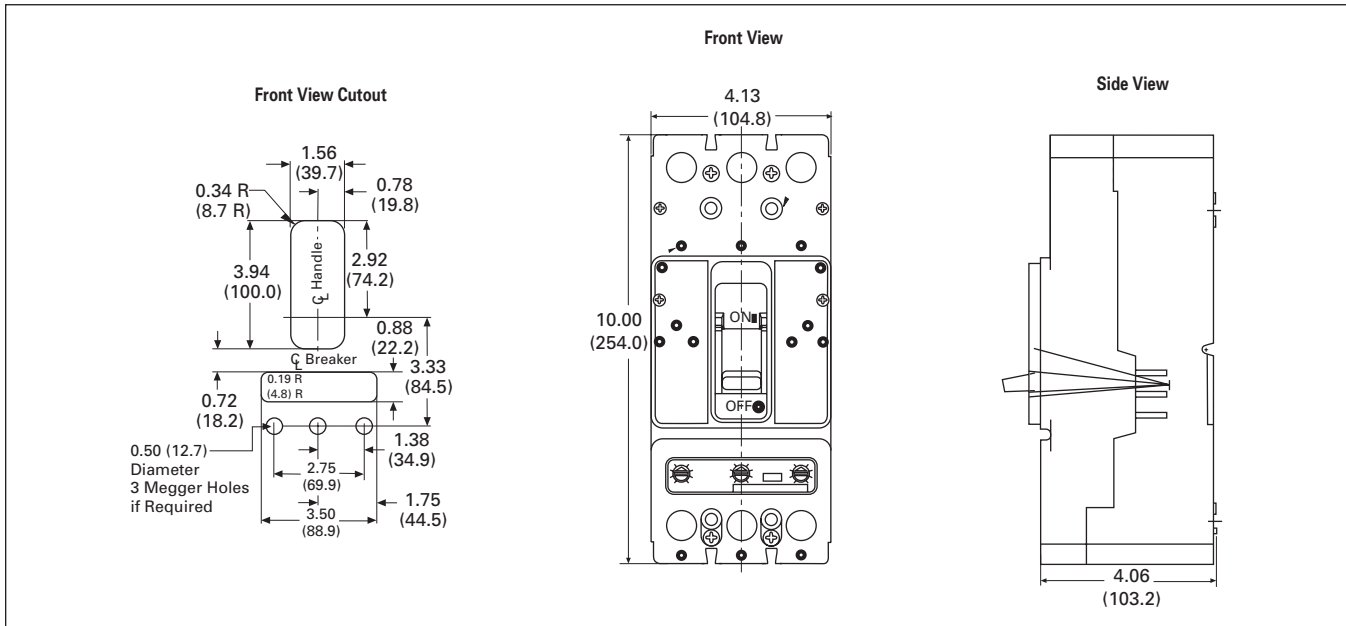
JD-Frame, 3-Pole — Dimensions in Inches (mm)
